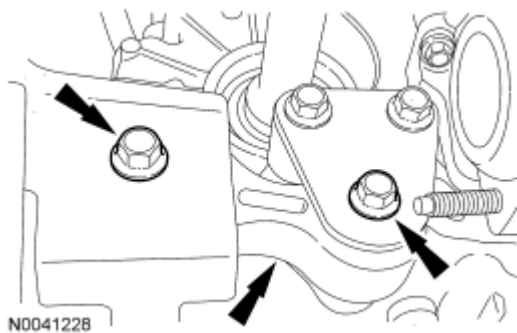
Identifying Engine Roll Restrictor And Bolts
